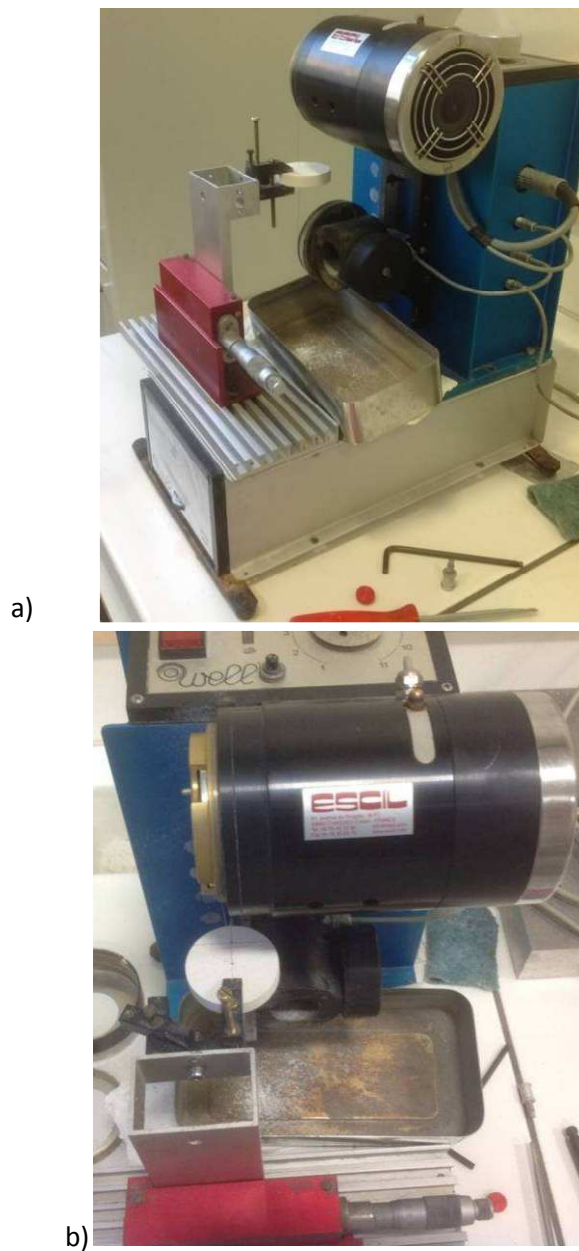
19 - Diamond saw machine a) view of the inclined plan b) up view of the cutting system (LMS-Polytechnique)
